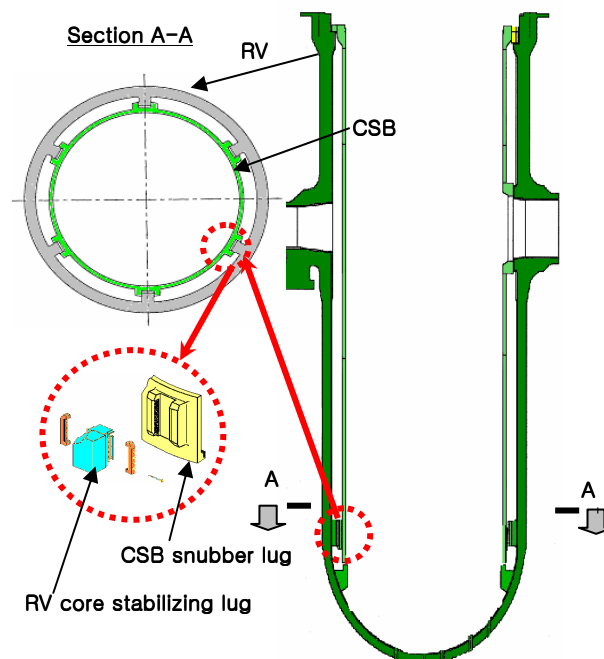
Assembly parts between RV core stabilizing lug and CSB snubber lug
